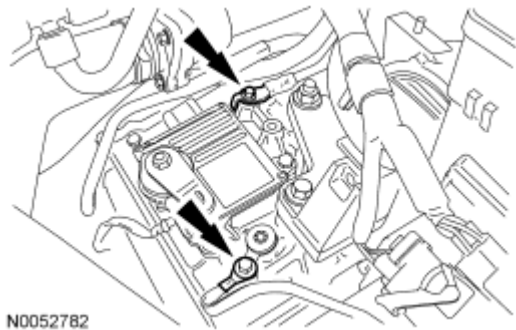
Identifying Starter Motor Electrical Connectors
